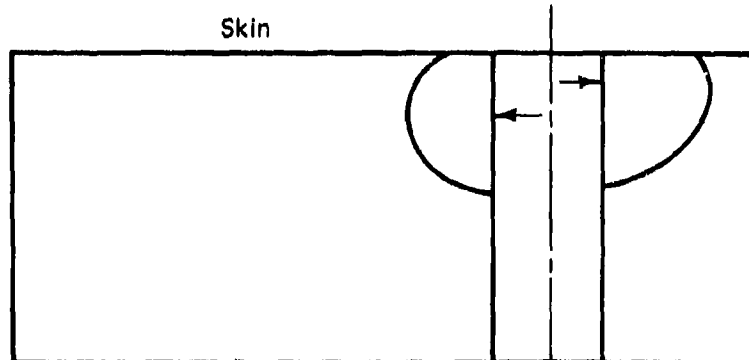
DETAILS OF STRAIN GAUGE POSITIONS ON SPECIMEN GJ2A15
